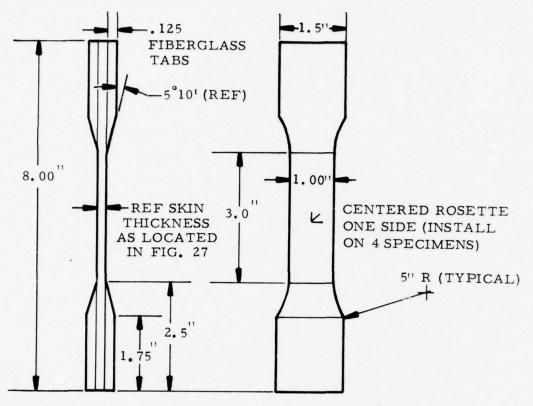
TENSILE COUPONS - MANUFACTURING DEVELOPMENT SPOILER
